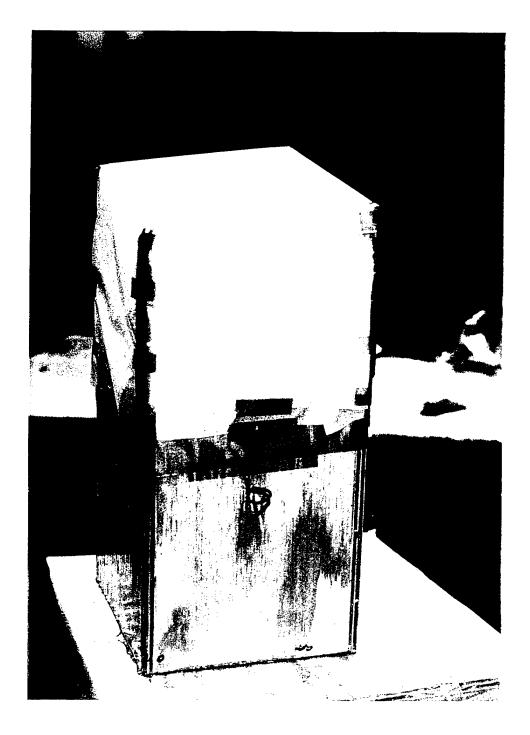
The Left-Handed Box Mold Used to Fabricate Bumper Panel Components in the Attempt at a Full-Up Bumper Panel.
